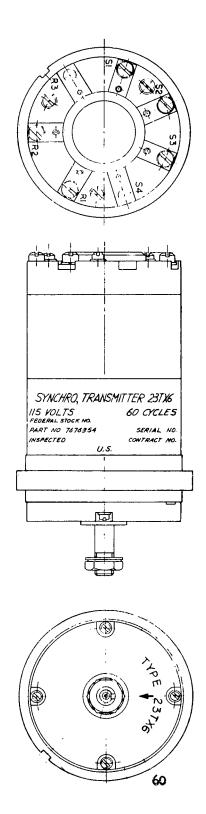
Synchro, Transmitter Type 23TX6 - assembled view
